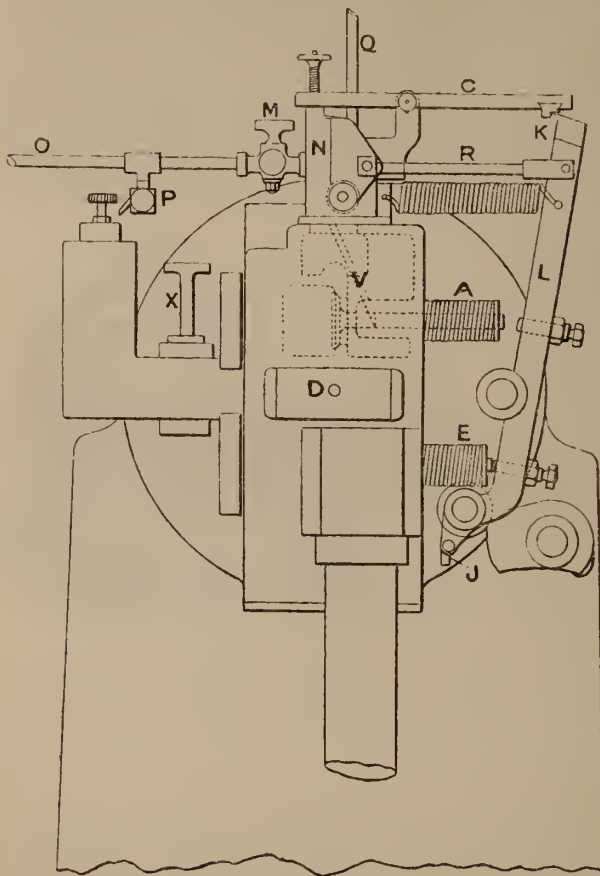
Arrangement of valves and levers in Wells Brothers' "Premier" Oil Engine.
